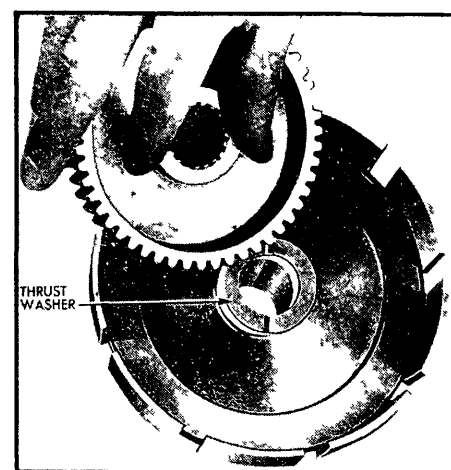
Installing thrust washer and clutch hub in reaction gear
